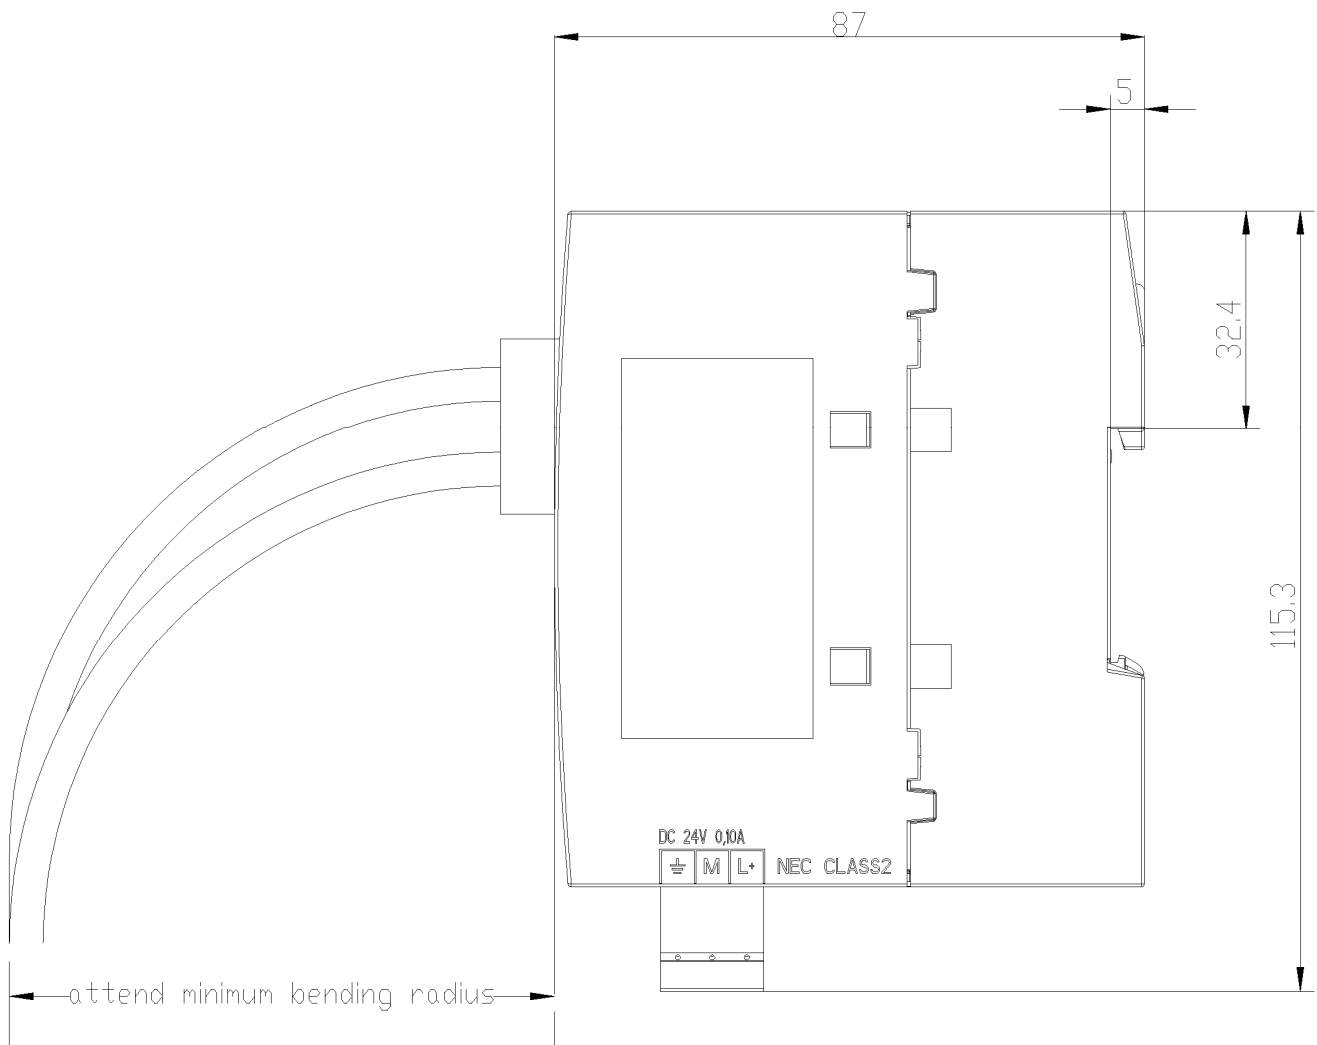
Dimension drawing, side view (example: SCALANCE XB004-1)
